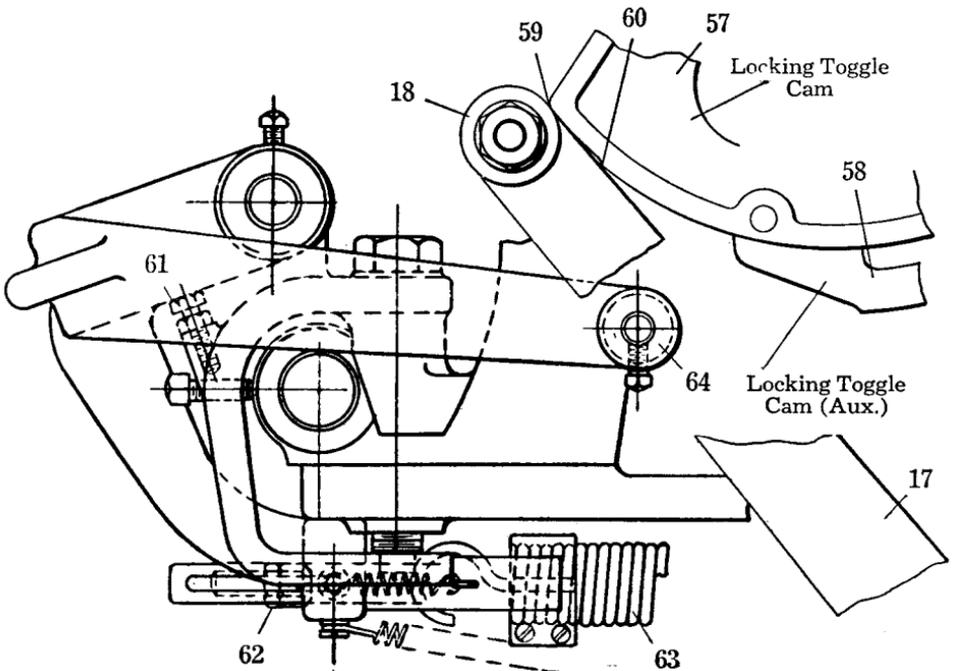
View of the locking toggle and auxiliary locking toggle cams and levers.
